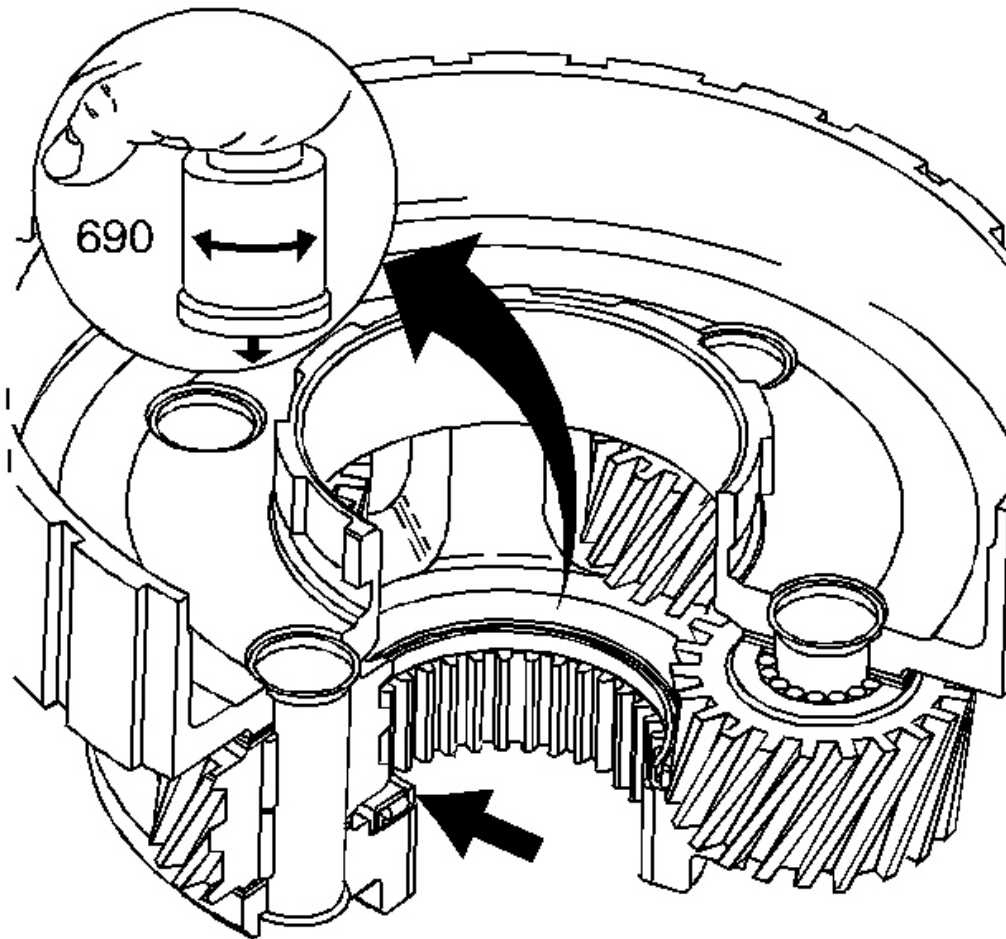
Illustrating Proper Inspection Of Reaction Carrier Captive Thrust Bearing
